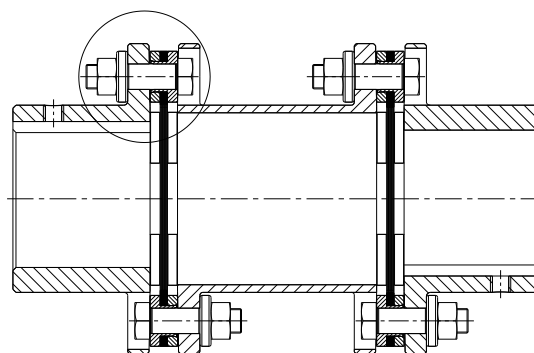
Assembly of laminae sets, RADEX®-N size 80 - 135
